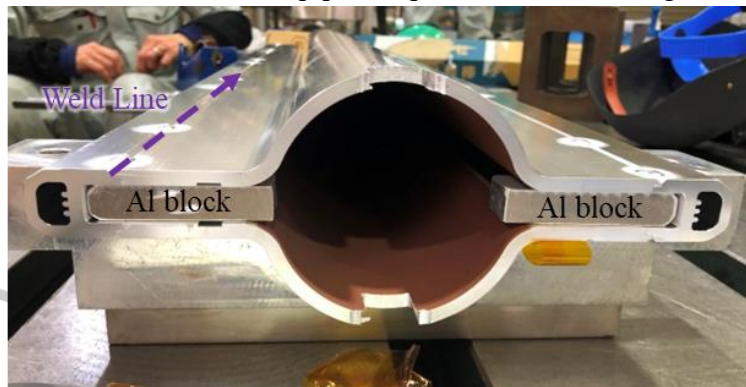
Beam pipe during welding. The aluminum blocks were applied to prevent deformation of the beam pipe during welding
